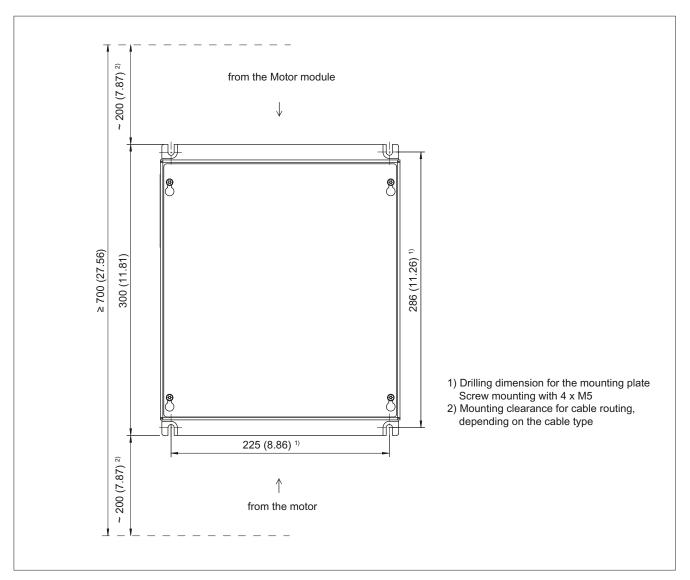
Mounting dimensions for a Voltage Protection Module VPM200
